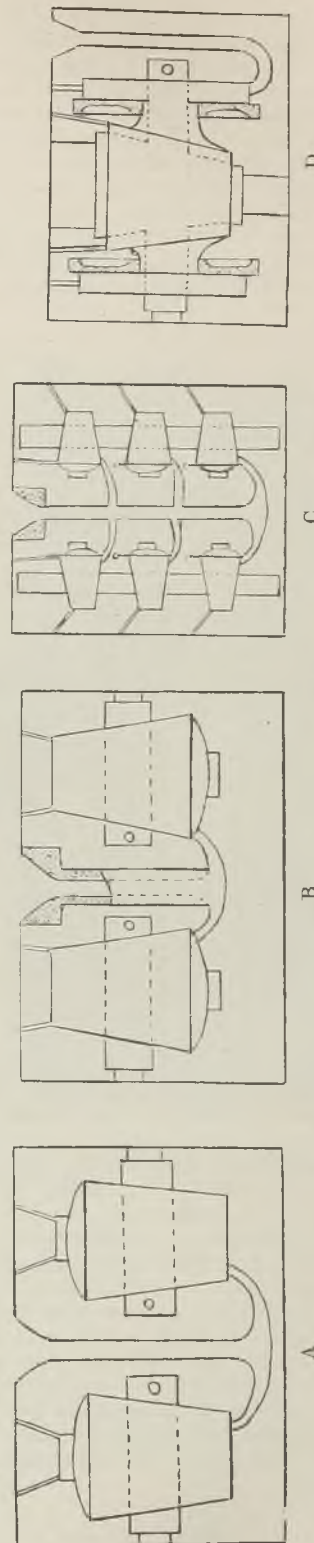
POSSIBLE DESIGNS OF PERMANENT MOULDS FOR GUNMETAL CASTINGS.
